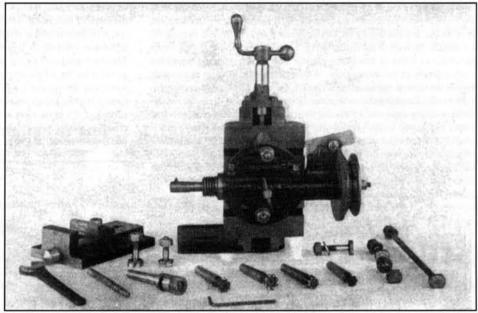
The Wheeler Manufacturing Co.'s Milling Attachment and Cutters.
